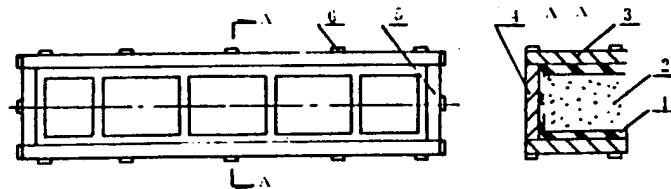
Bulkhead Plate Forming Mould Composite Schematic
